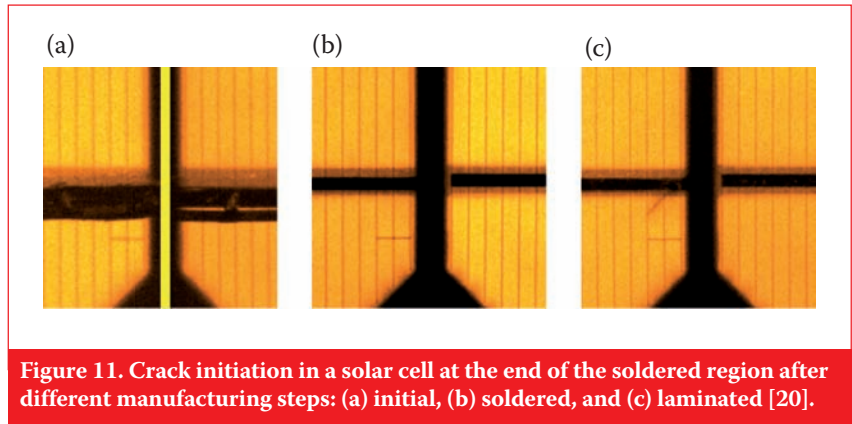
Crack initiation in a solar cell at the end of the soldered region after different manufacturing steps: (a) initial, (b) soldered, and (c) laminated [20].
